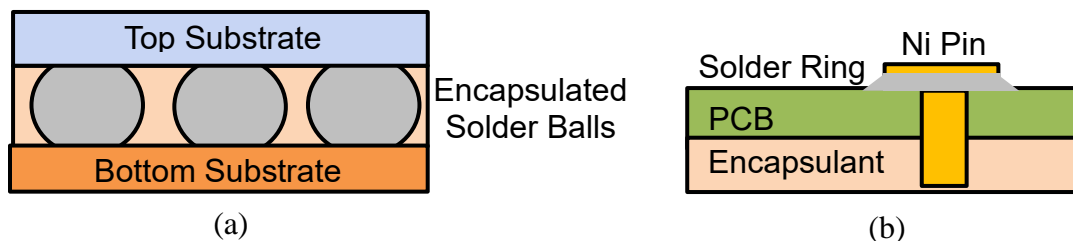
The difference in geometry between the solder bonds. (a) In BGA packaging, the solder bonds are situated between two substrates. Thermal warpage of the substrates, which is most extreme at the edges of the package, causes failure. (b) The solder ring is not in between two substrates, rather it holds the pin head to the PCB. Of the two structures that the solder bond interacts with, the PCB undergoes the greatest warpage during cycling, applying loads to both the solder bonds and pins.
